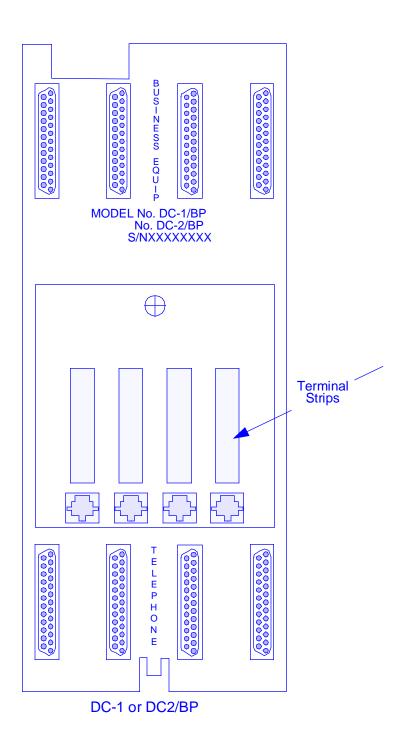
USS DC-to-DC Backplane Assemblies (Sheet 1 of 7)
